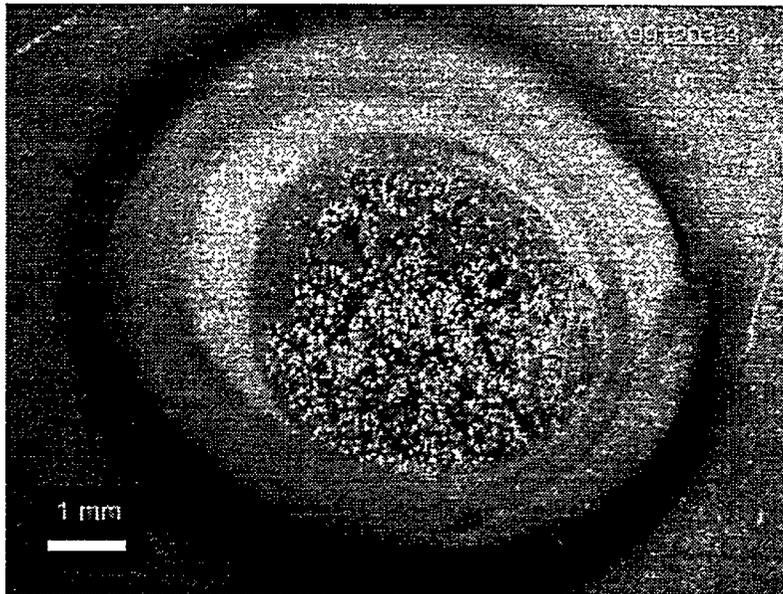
Fractography of the weld (Test No. 991203-3), separated by using a wedge.
